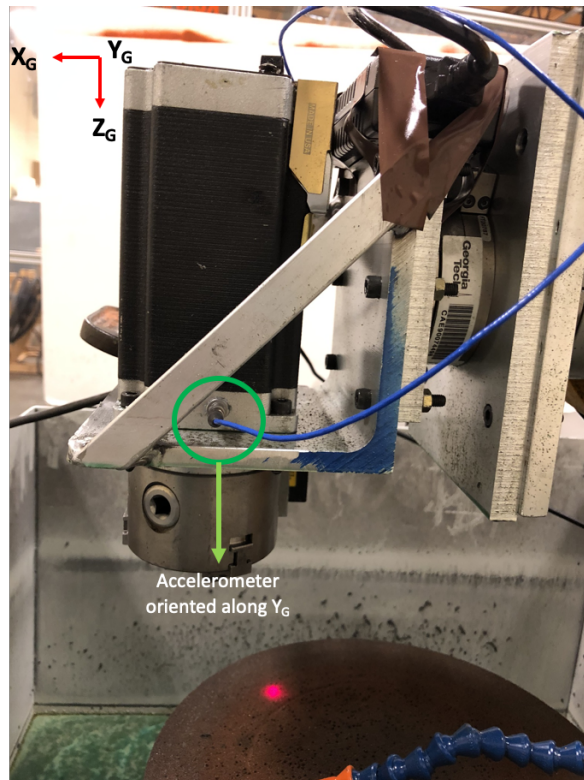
Uniaxial accelerometer mounting for measurement of FRF along Y_G (axes shown is the global frame attached to robot base).
